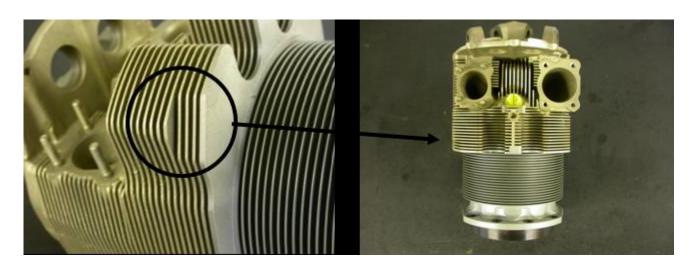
Cylinder Head Casting Four (4) Fin relief Location
